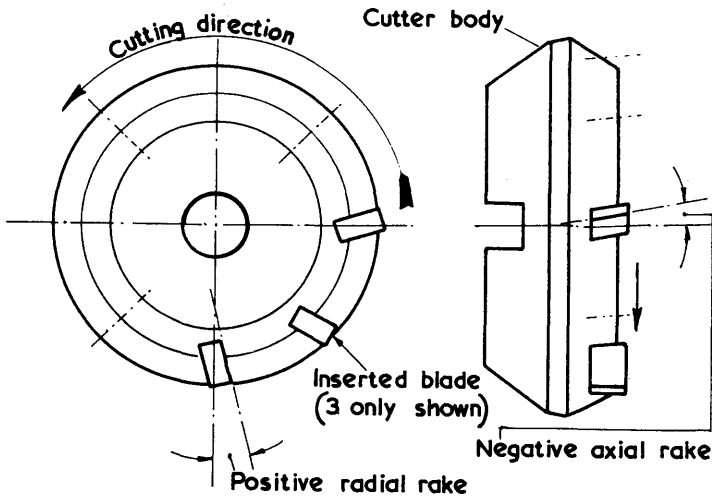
Inserted-blade Negative-rake Milling Cutter.
